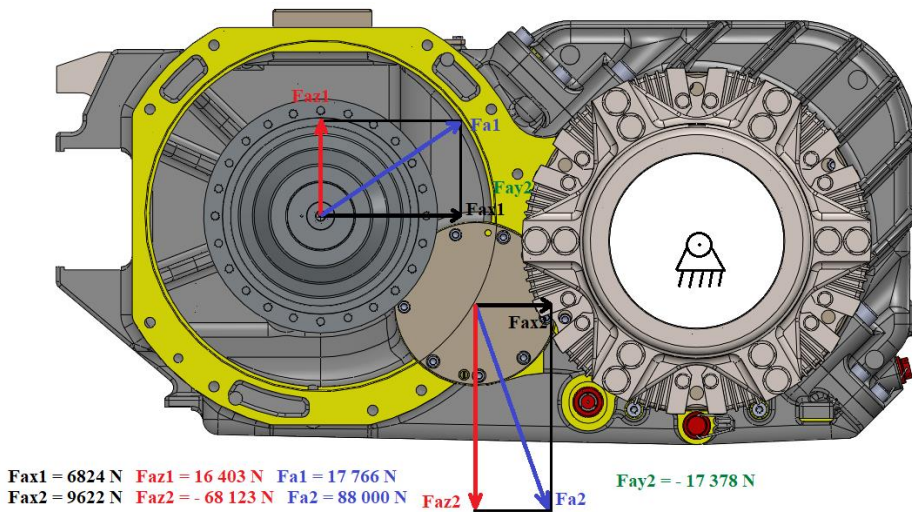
Load on the 1st and 4th bearings in operating Mode I.
